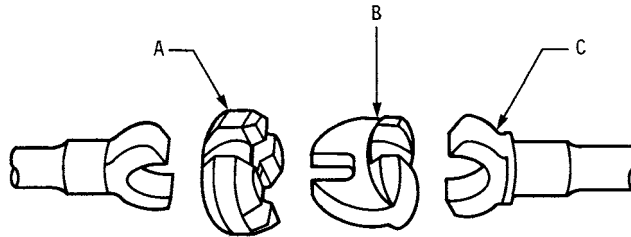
Exploded view of the Tracta universal joint. A, grooved coupling; B, tongue-and-groove coupling; C, fork yoke. (From Ref. [16.6].)
